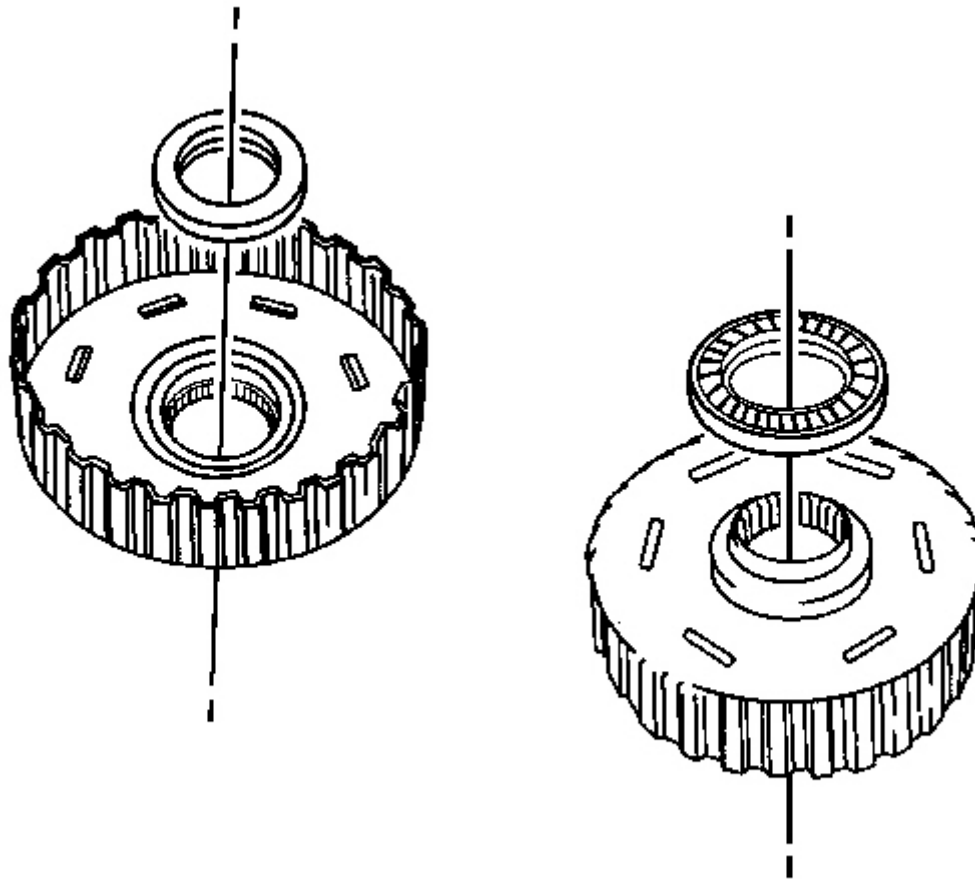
Thrust Needle Roller Bearing & Forward Clutch Hub
